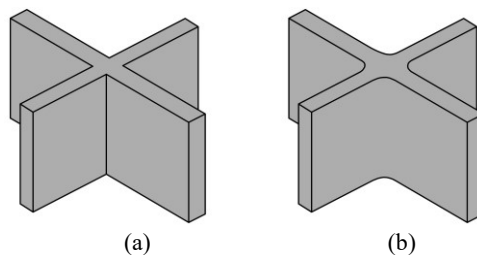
Direct Crossing with no internal fillets (a) and with internal fillets (b)
